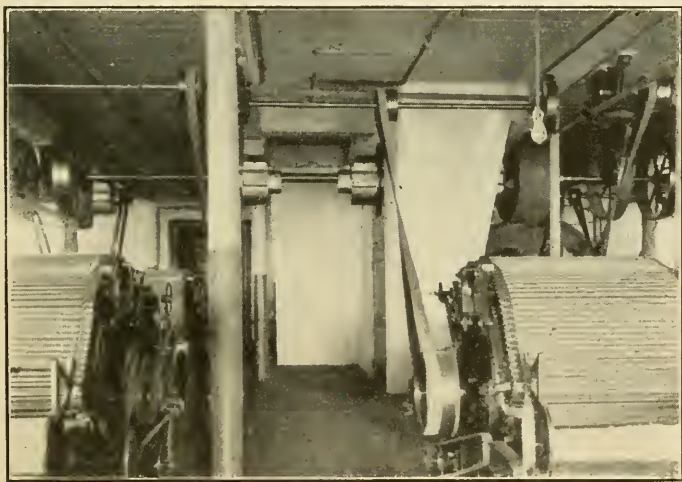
CARD ROOM, THIRD STORY. END VIEW OF BELT ENCLOSURE. BEARINGS ALL OUTSIDE
